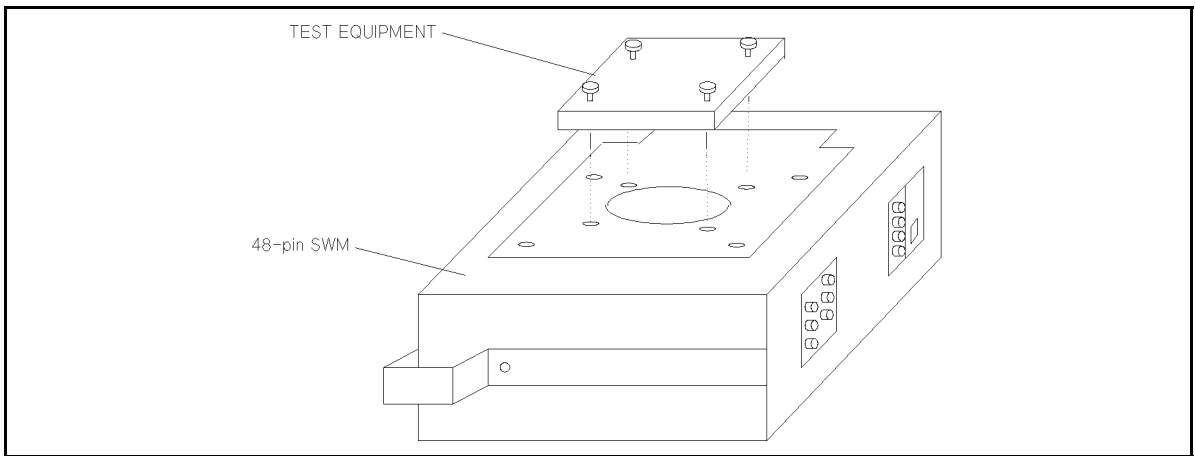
Mounting Test Equipment (48-pin SWMs)
